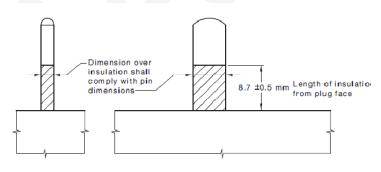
DIMENSIONS OF INSULATION ON INSULATED LIVE PINS
